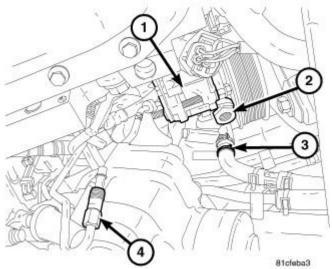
Power Steering Pump Components Courtesy of CHRYSLER GROUP, LLC
